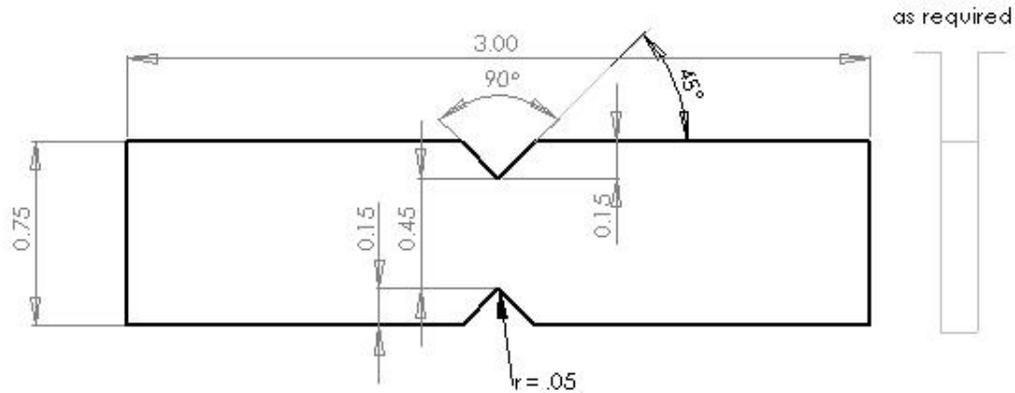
Shear Test Specimen Geometry (Courtesy of TRL)
